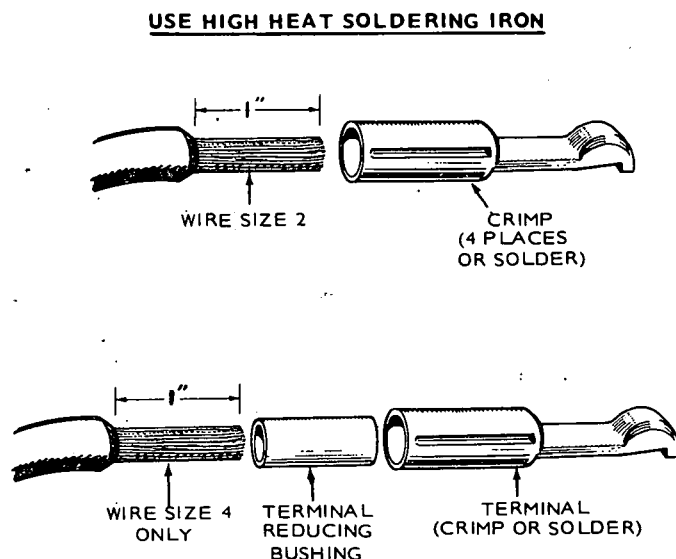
CABLE WIRE TO TERMINAL CONNECTIONS
